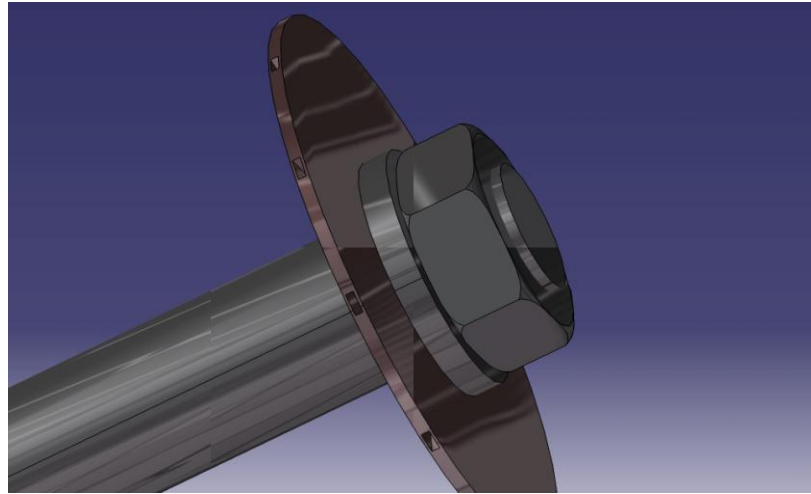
Fixing the stratified disk on the tubular shaft of the cutting machine through EEC.
